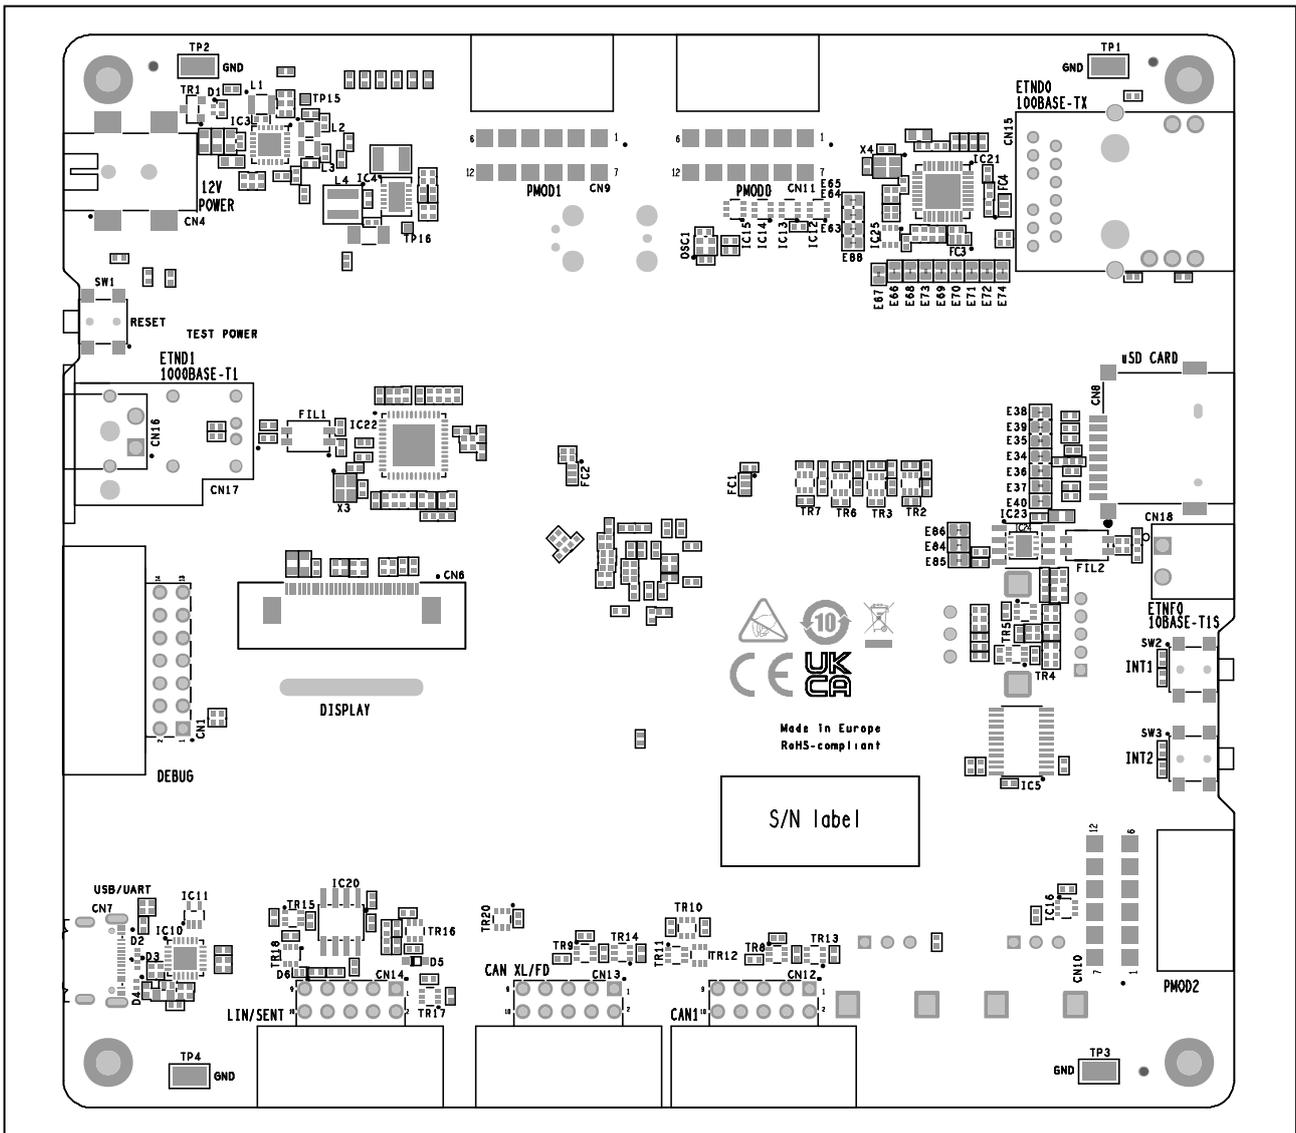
Starter kit board bottom view for board version D020925_06_V0200
